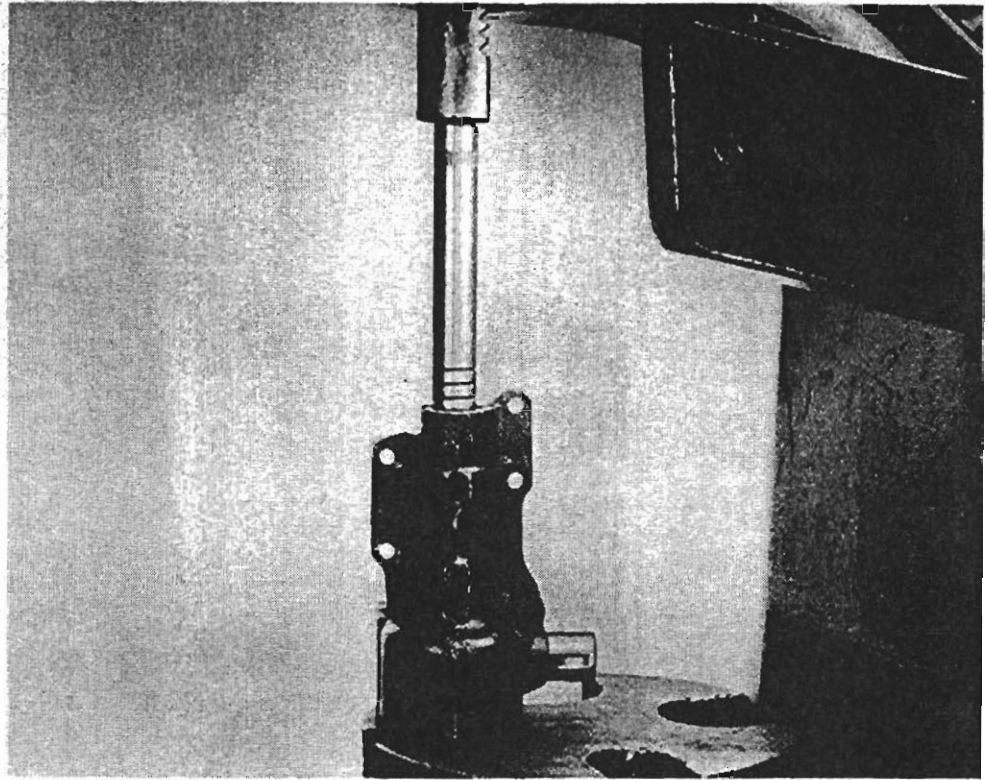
New Bushings Should Be Burnished and Expanded into Position Using the Burnisher J-2551-2.
